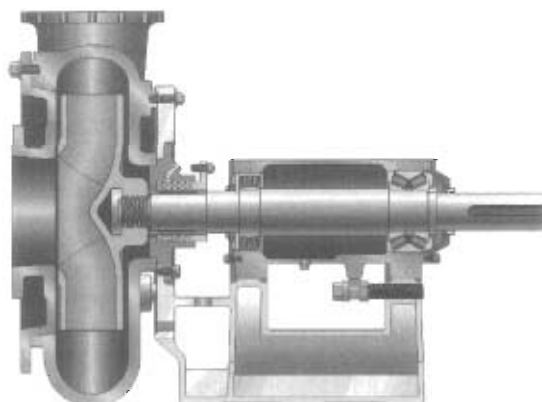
Cross-section through a heavy duty hard metal solids handling pump
